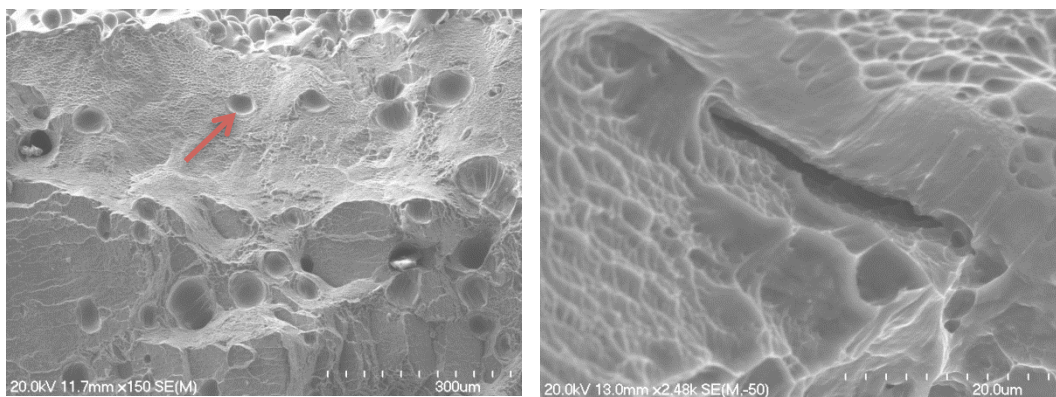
Fracture surface of G3 (750mm/s)
